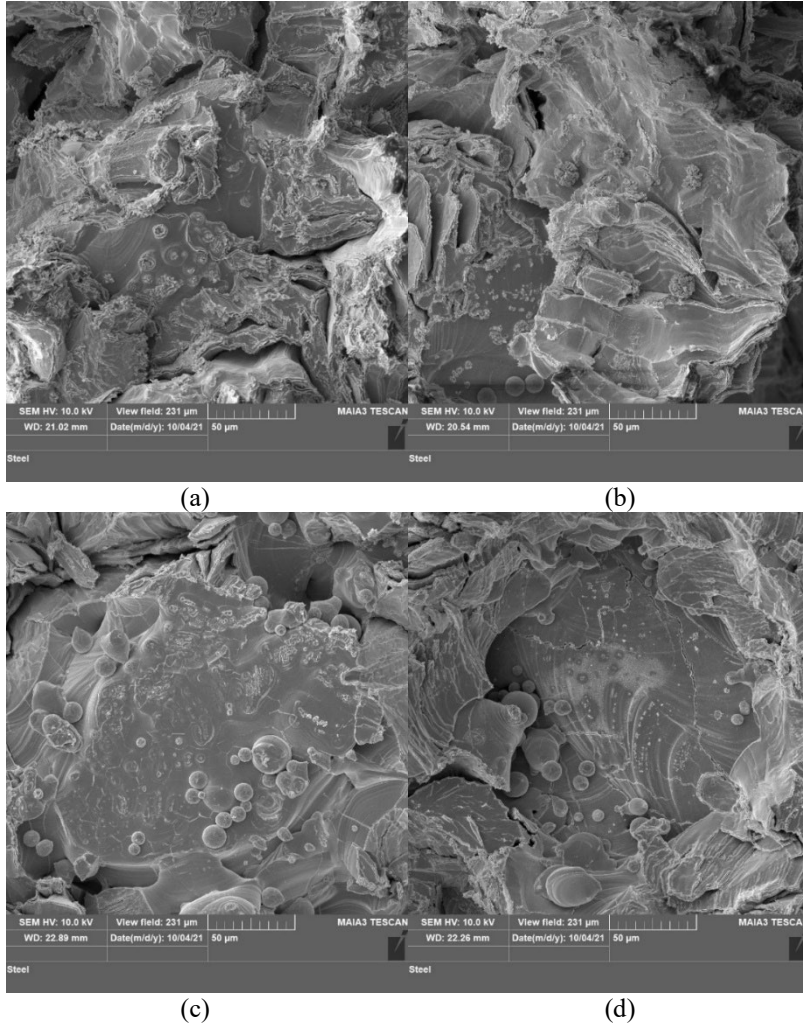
Fracture Surfaces of Samples Processed in 100% N₂ at 100 mm/s (a), 200 mm/s (b), 400 mm/s (c), and 600 mm/s (d), Subjected to Three-Point Bend Testing at 600 °C at 1.2kx Magnification
